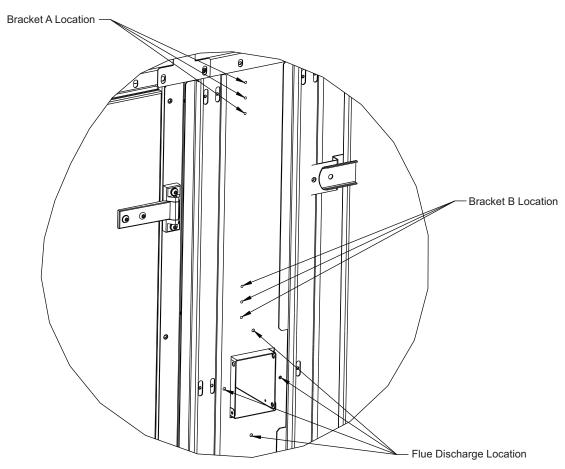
Flue Discharge Deflector Mounting Position — Low Heat (Detail View)
